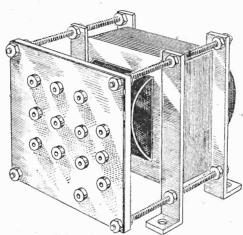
Showing how the clamping strips are made and fixed, and a suggestion for a terminal board.
